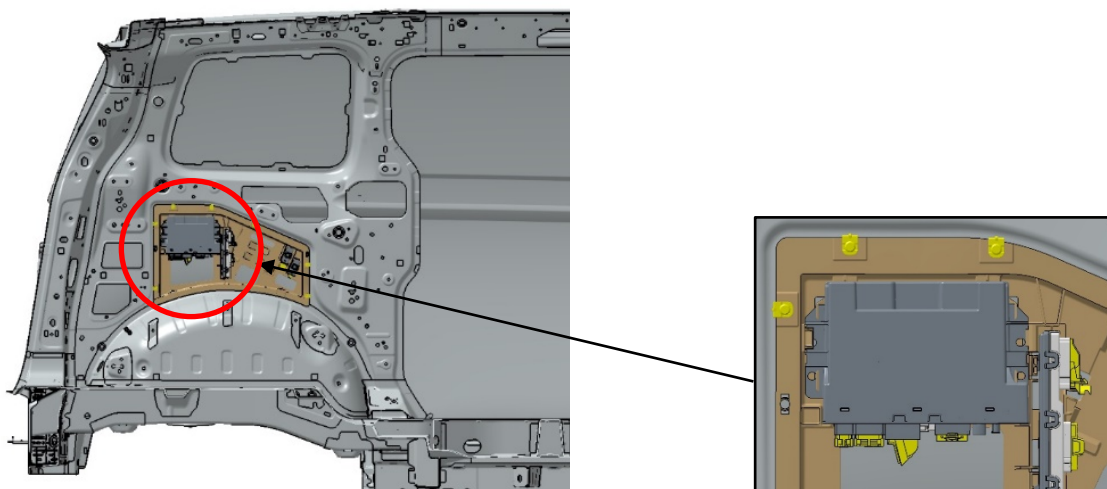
Installation position of the CFCU behind the side panel trim above the rear left wheel housing
